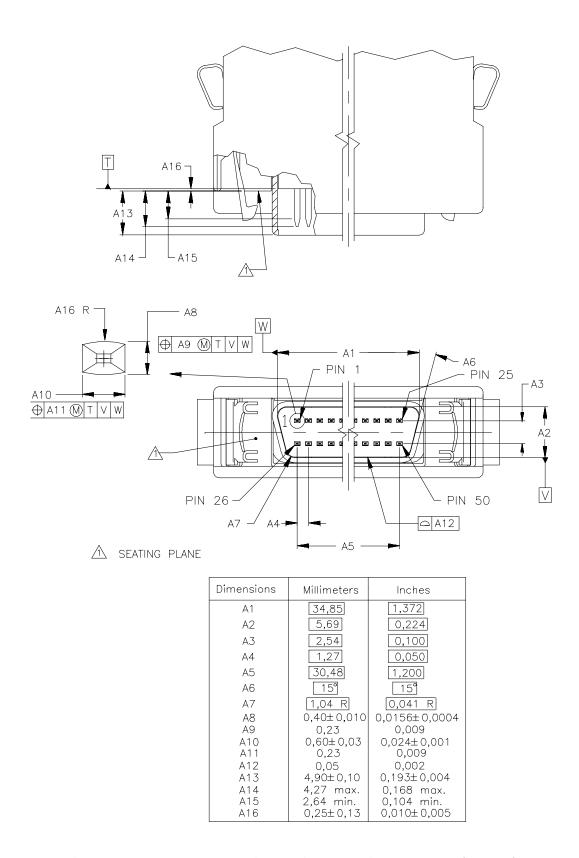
50-contact alternative 1 shielded mating connector (A cable)
